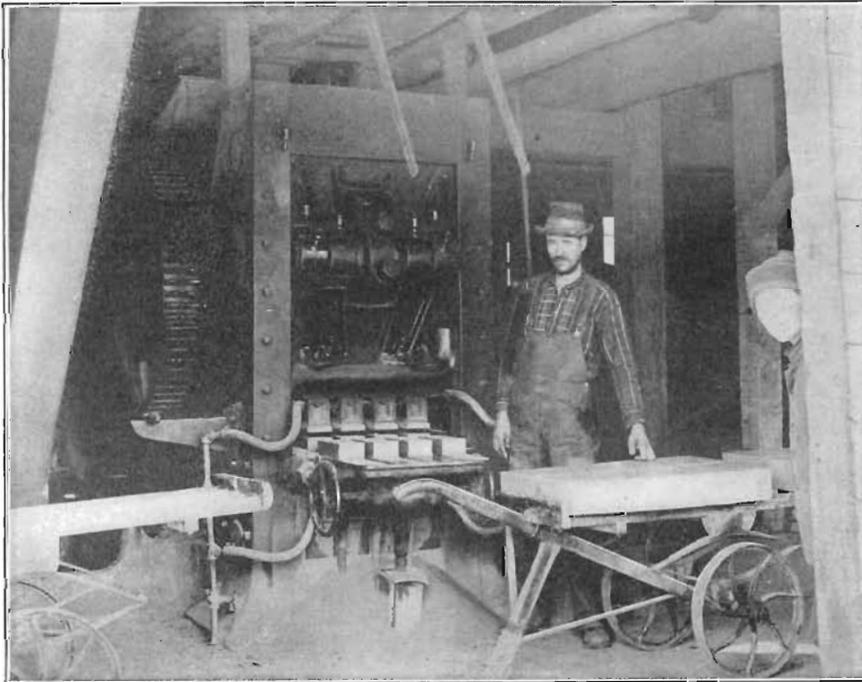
Boyd four mold, dry press machine; Corey Pressed Brick and Coal Company, Lehigh, Iowa.
